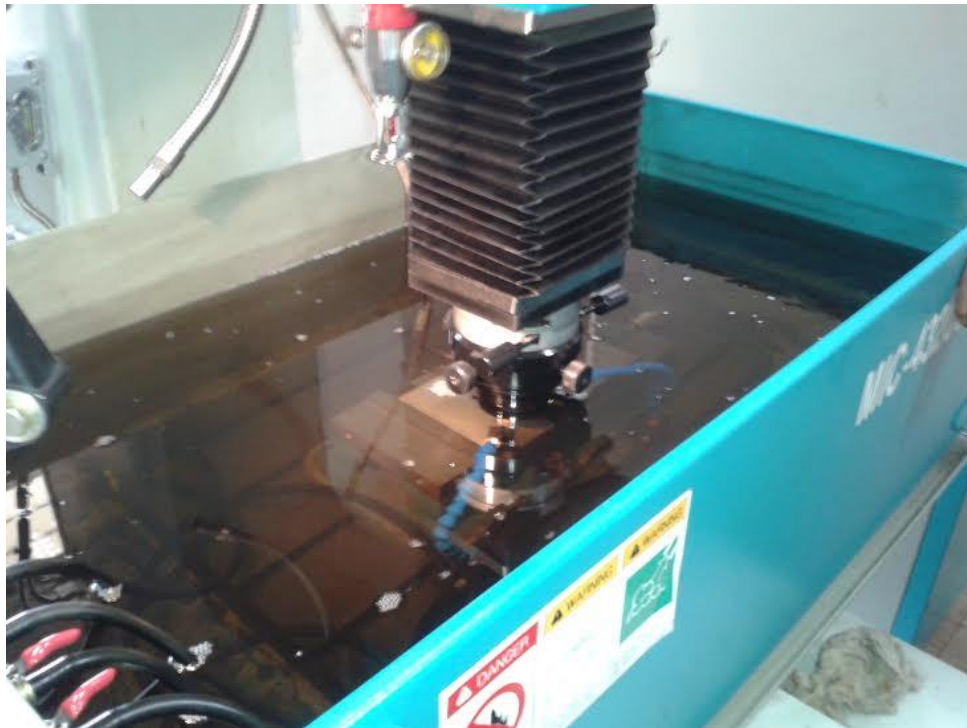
CNC die sinking EDM machine (ECOWIN PS 50ZNC) on experimental set up
